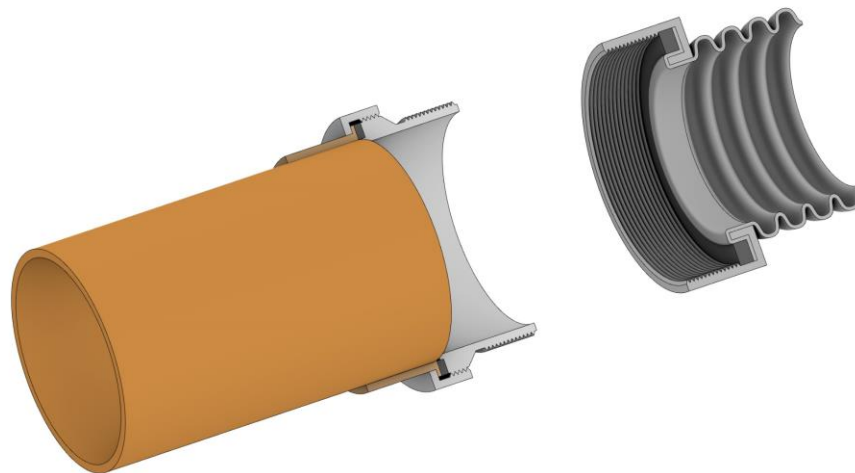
Axonometric diagram of copper piping and flexible steel piping.
